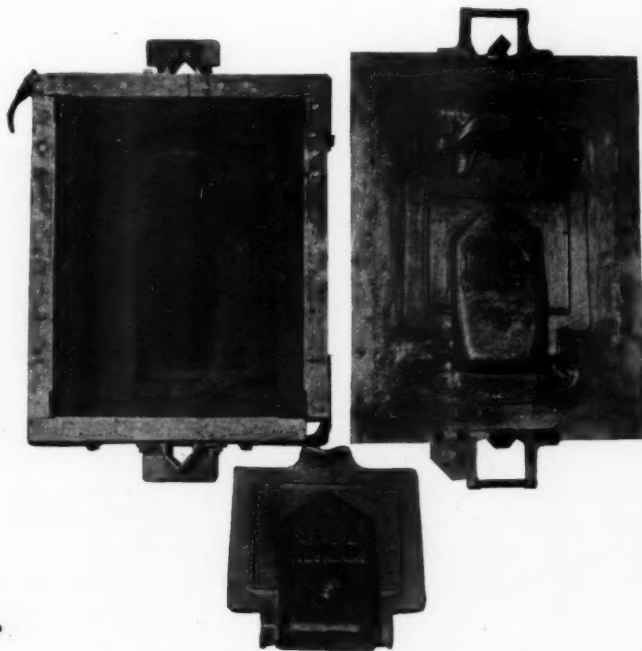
JOURNAL BOX COVER MOUNTED FOR TABOR MACHINE.
